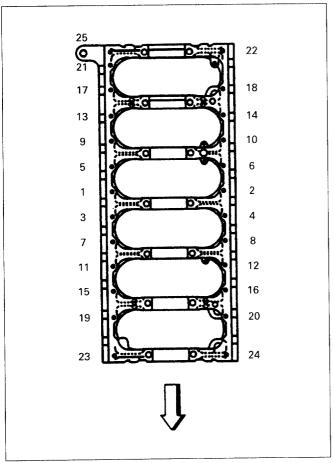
Cylinder Block to Lower Crankcase Bolt Tightening Sequence
